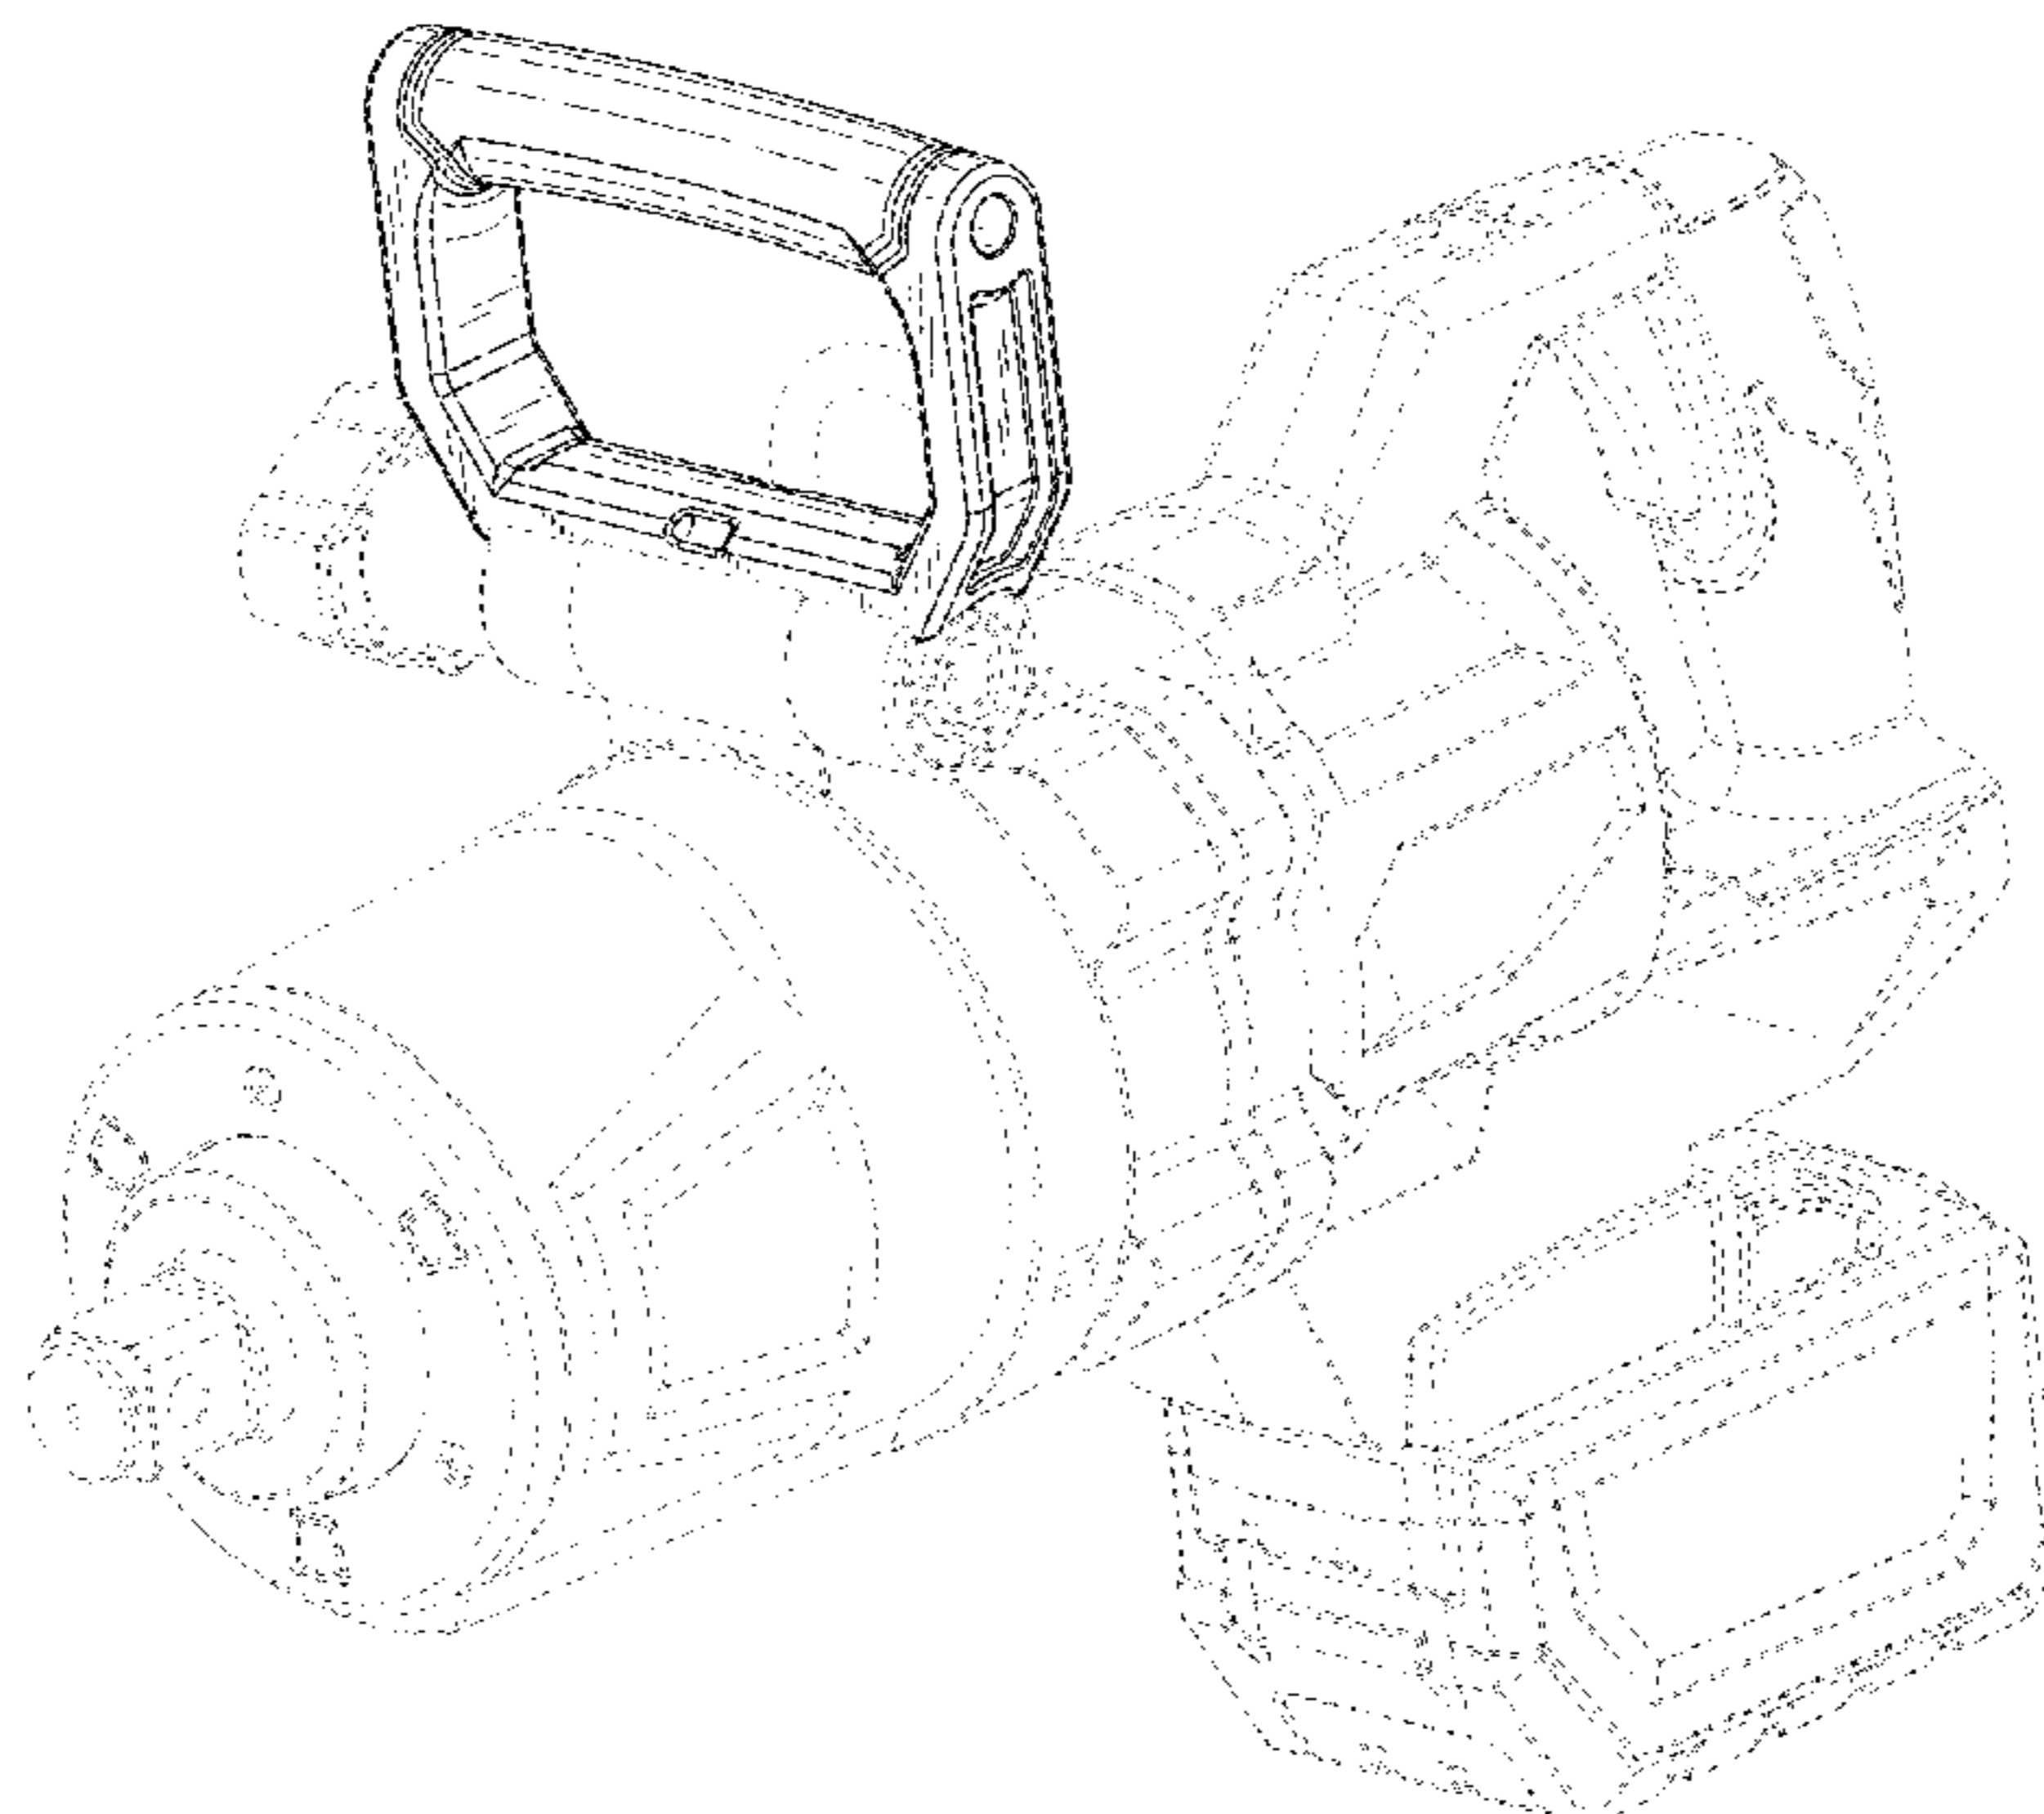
is a front perspective view of a rotary impact wrench embodying our new design;
